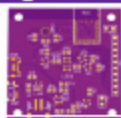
Printed Circuit Board Used to gather data for the virtual coach.
